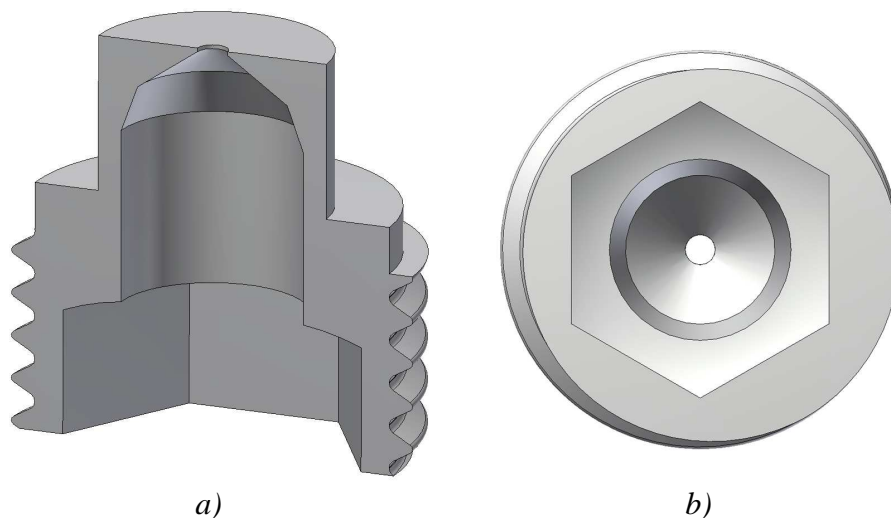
Conventional orifice die – section view (a), bottom view (b)
